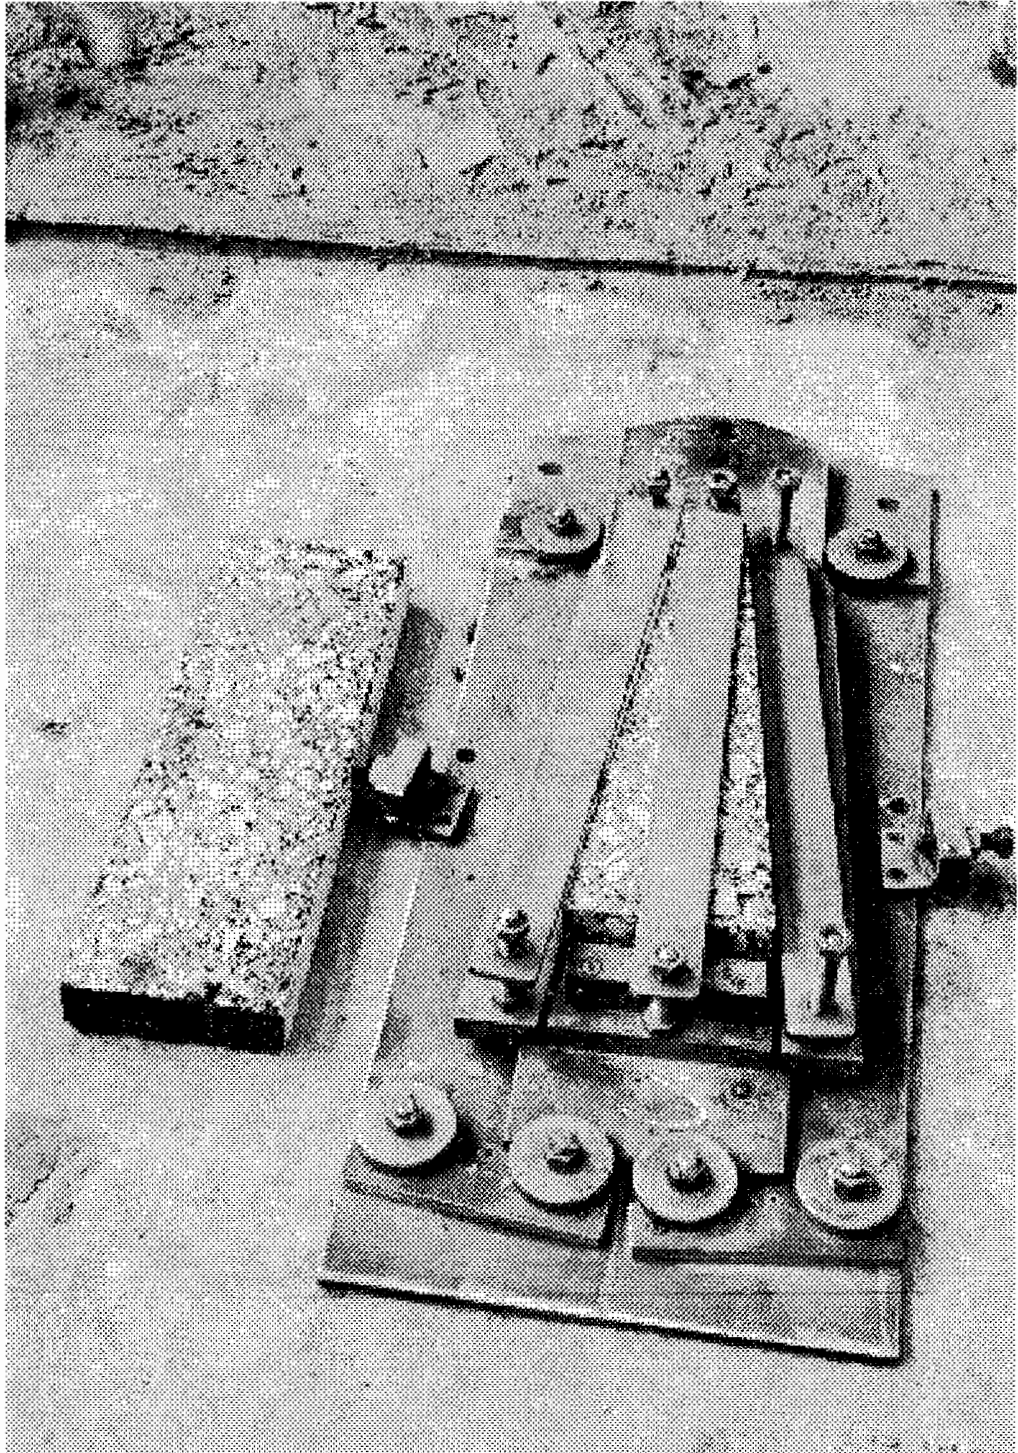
Jig for Sawing Trapezoidal Specimen
